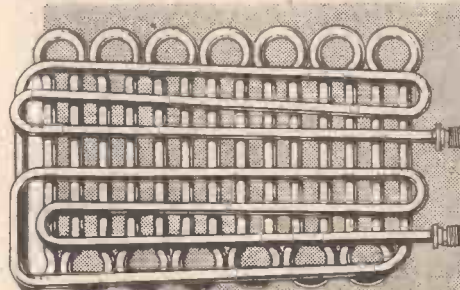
(Right).—The Serpollet type with flat square grids of 10 or more sections, but many screwed joints. Each section consisted of 33ft. of approximately 5/8in. diameter tube.
